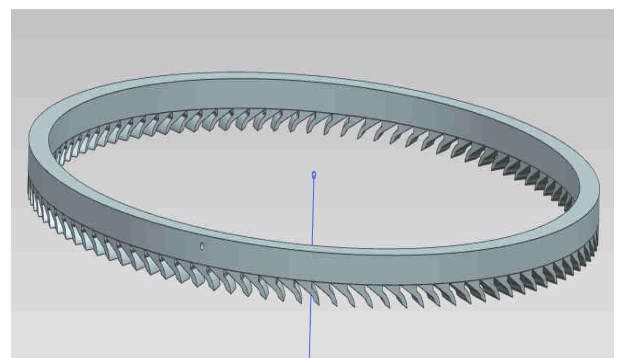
Electrode A for machining Symmetric blade of LPOT turbine rotor
